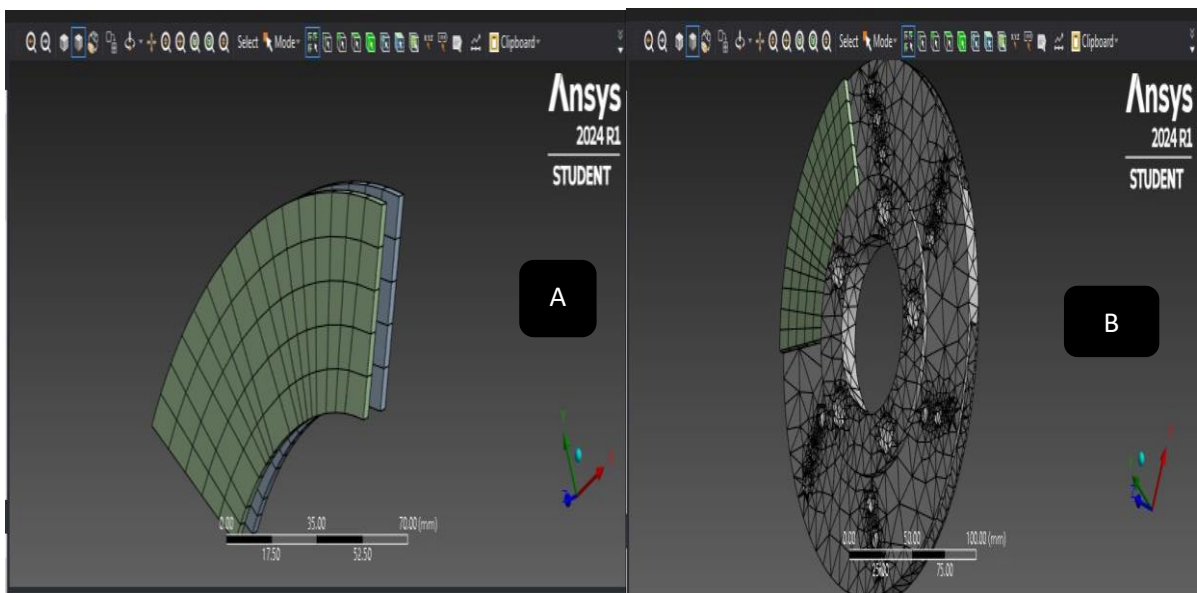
(A) Meshing of brake pad and (B) disk brake assembly by ANSYS
